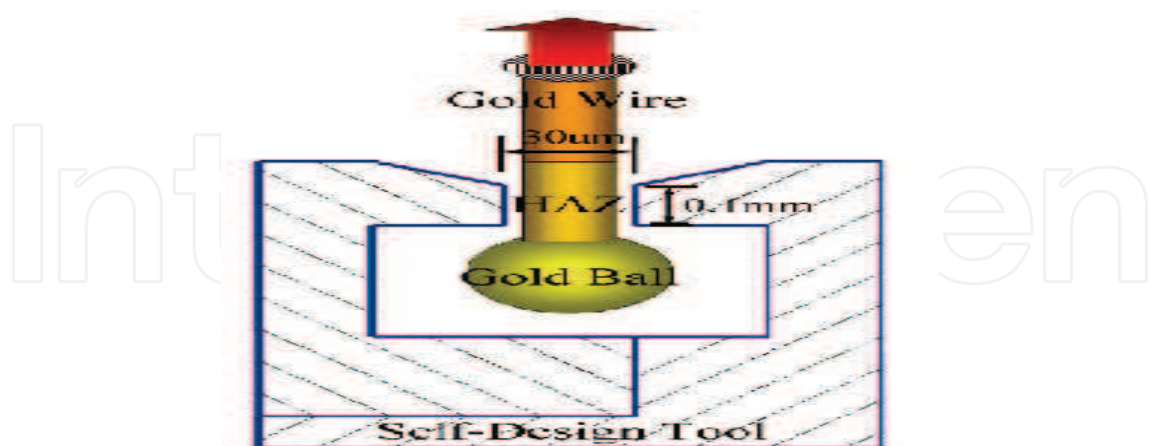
Self-design tensile test fixtures for EFO wire (HAZ).
